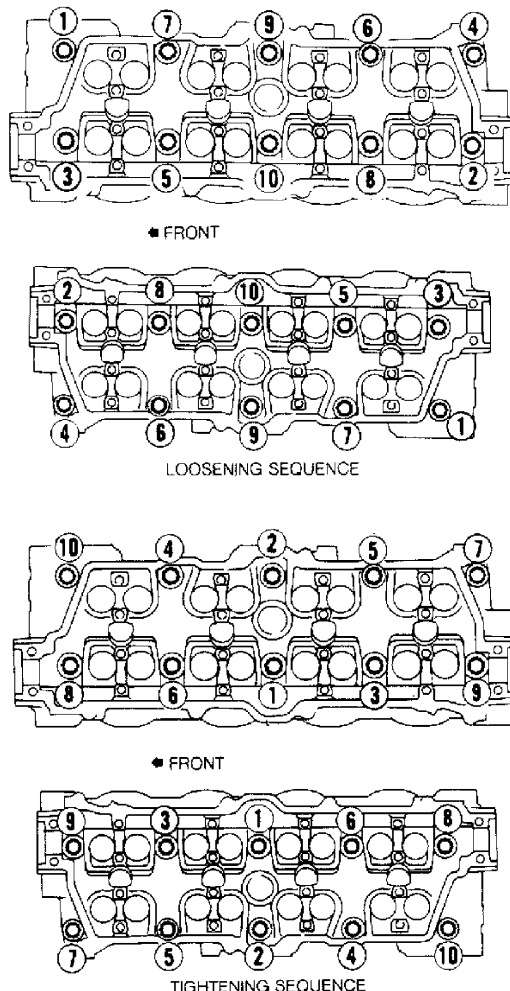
Cylinder Head Bolt Loosening & Tightening Sequence
